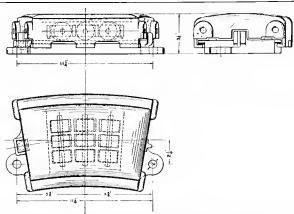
Creco Covered Roller Side Bearing for Four-Wheel Passenger Train Car Trucks.
